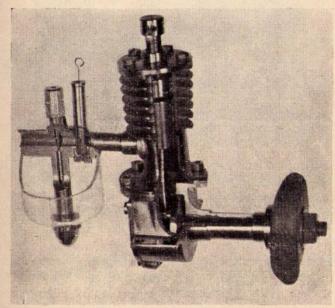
Sectionalised "Majesco" diesel of 2-c.c. showing piston and contra-piston above it.
